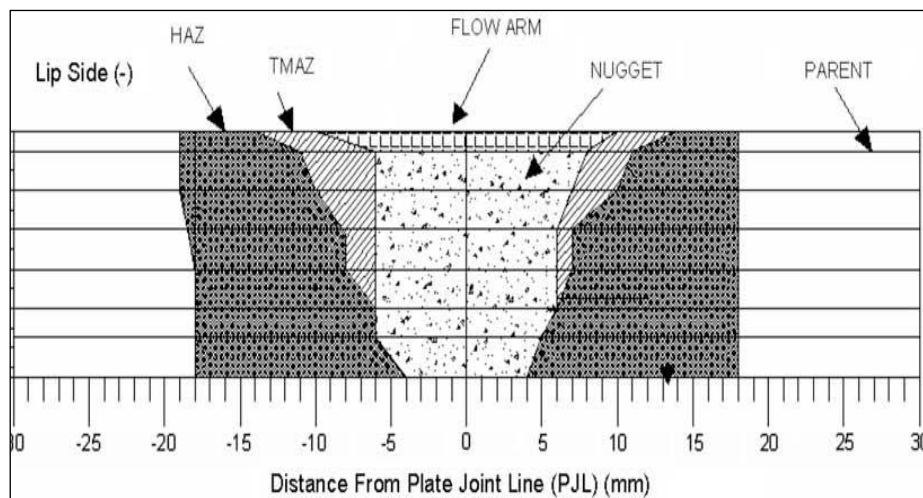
Schematic presentation of zones in friction stir welded joint
